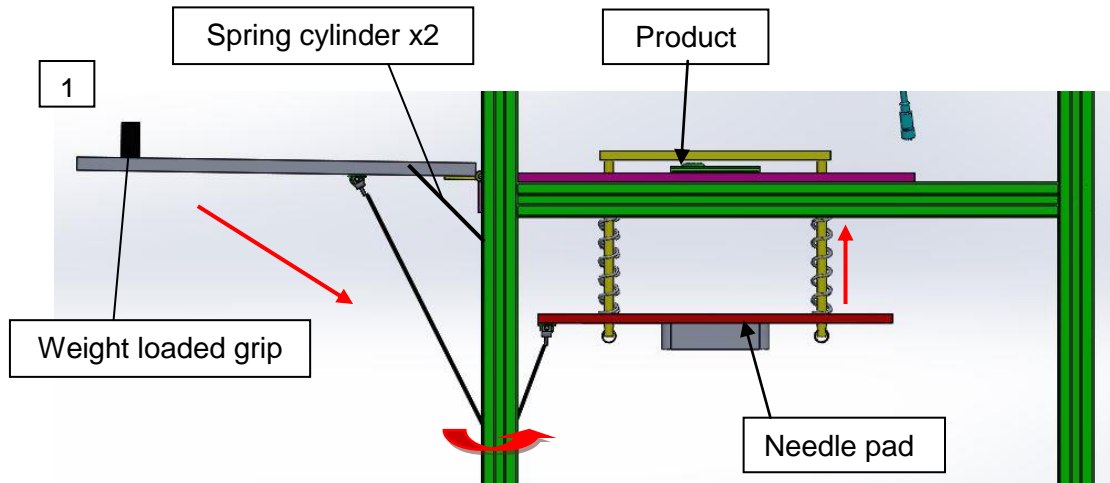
Holes responsible for covering the compressed springs while connecting DUT fixture with needle pad.
